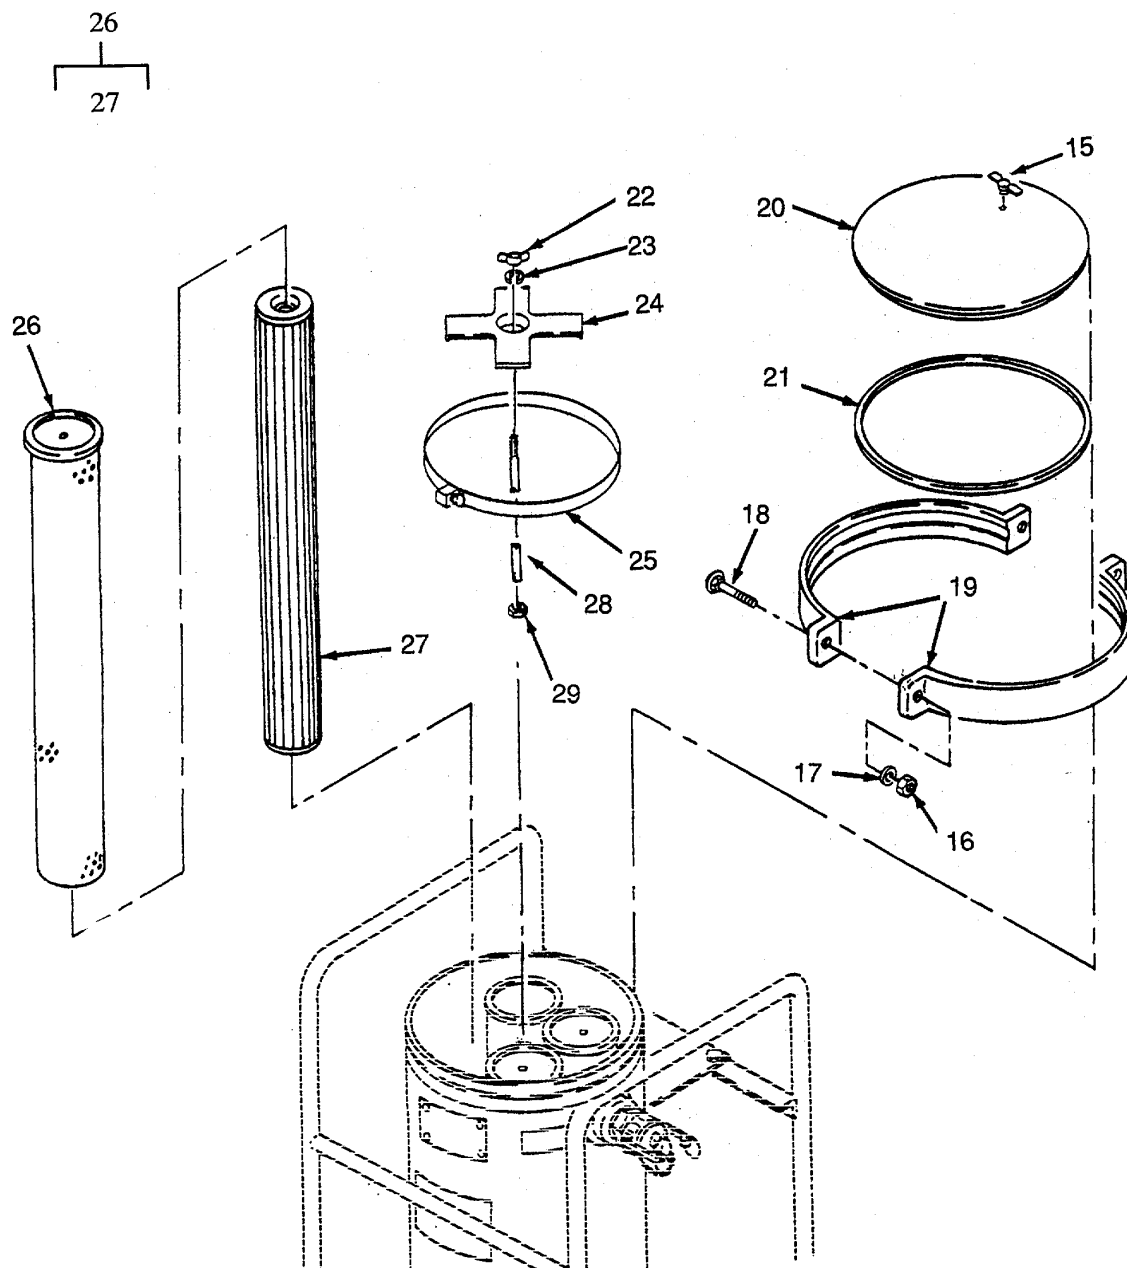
Tank and Frame Assembly (Sheet 2 of 2)
